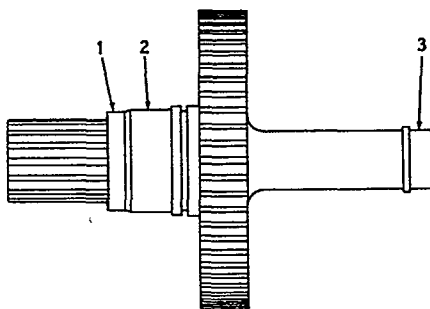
Drum Pinion Shaft Assembly, R.H. Shown
